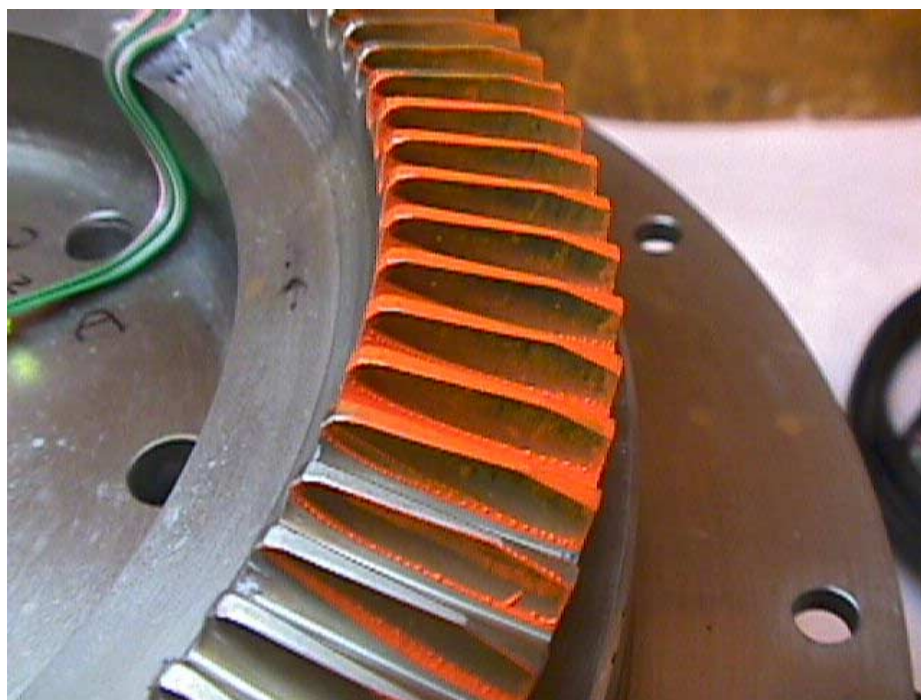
Upper face gear tooth patterns for Idler 3 mesh.
